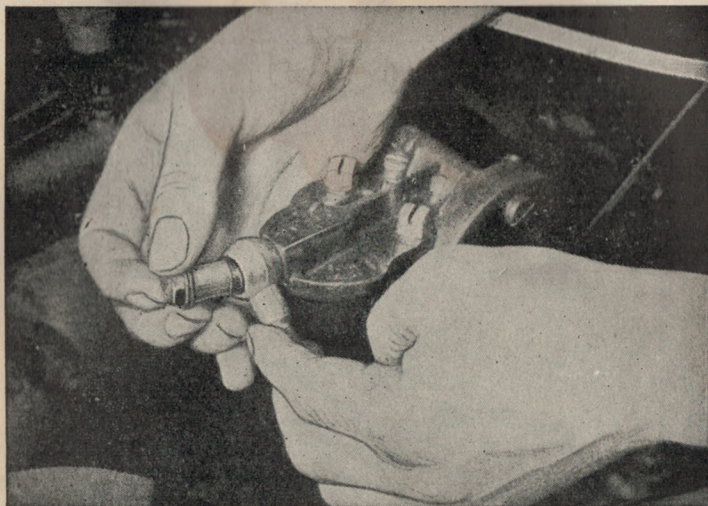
REMOVING PETROL PIPE FROM CARBURETTOR
